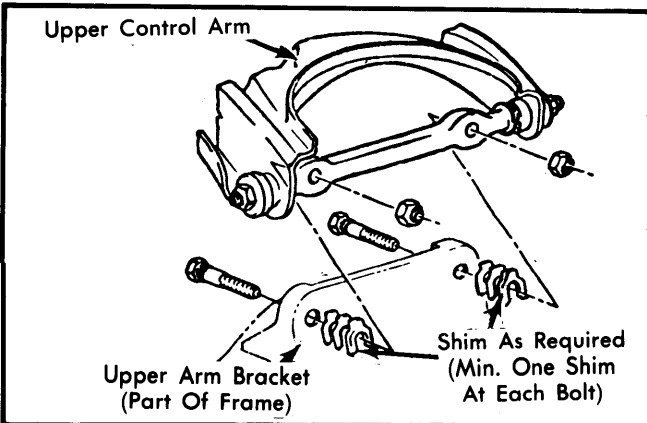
Pontiac Caster and Camber Adjustment (Except Phoenix)
